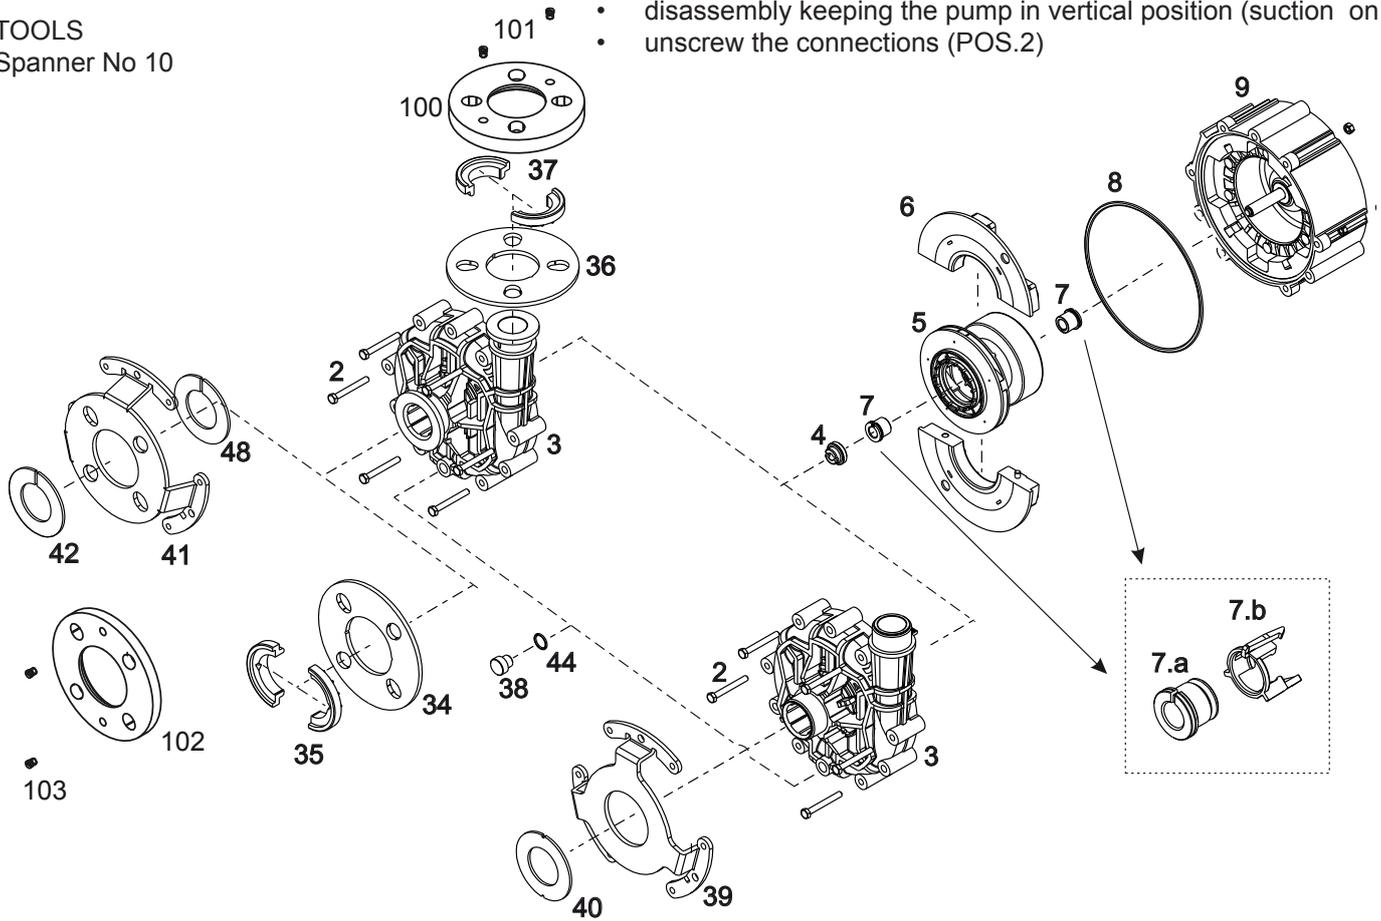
A – disassembling sequence HYDRAULIC PARTS
